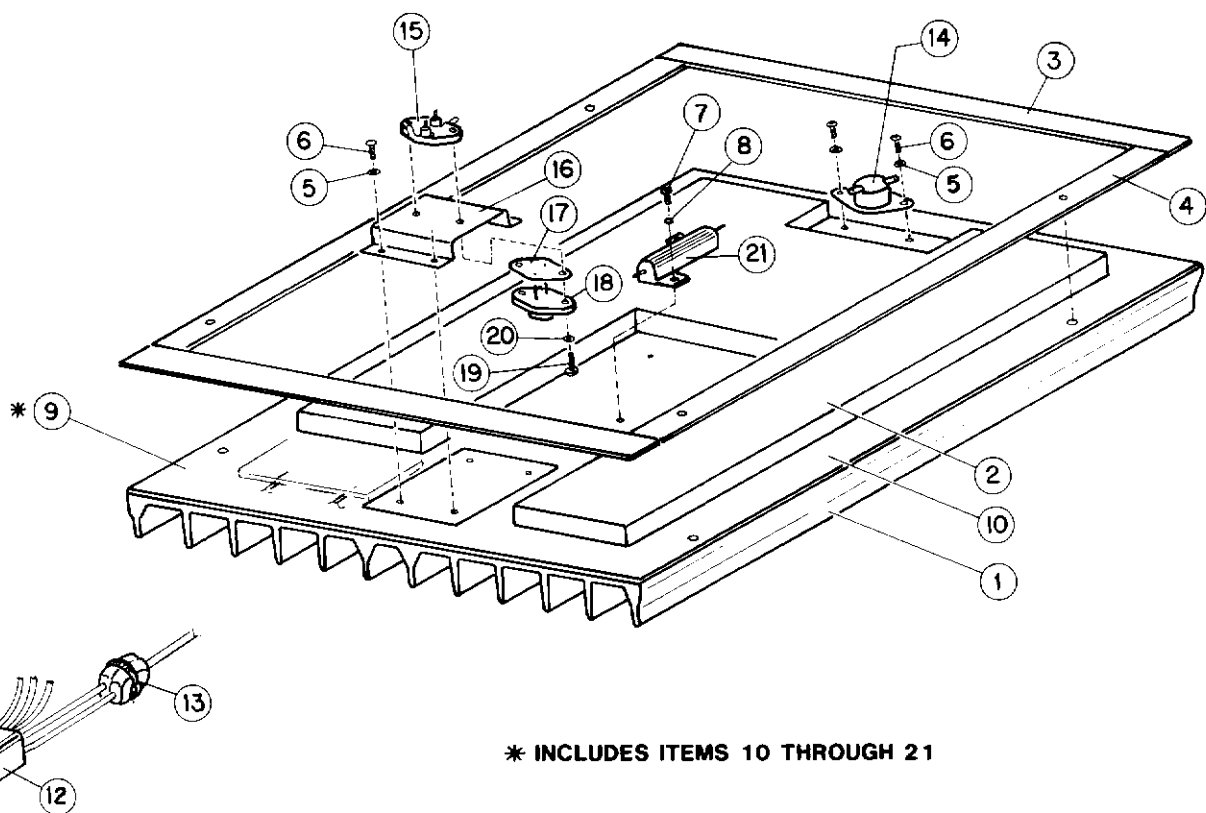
PARTS LOCATION DIAGRAM, HEATER ASSEMBLY
